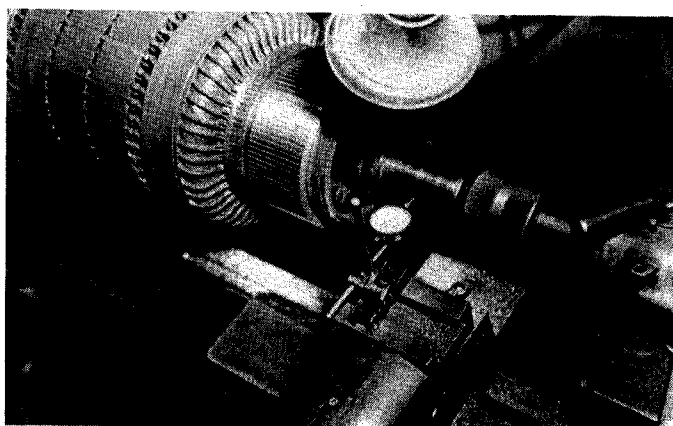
Centering Shaft In Lathe Before Turning Commutator
